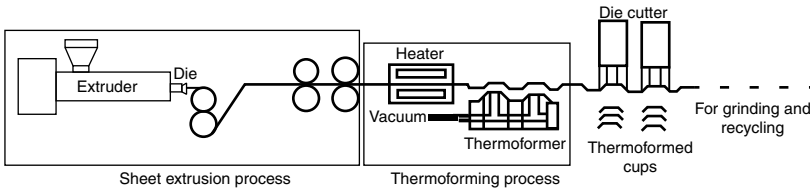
Continuous sheet forming extrusion *via* the thermoforming process
